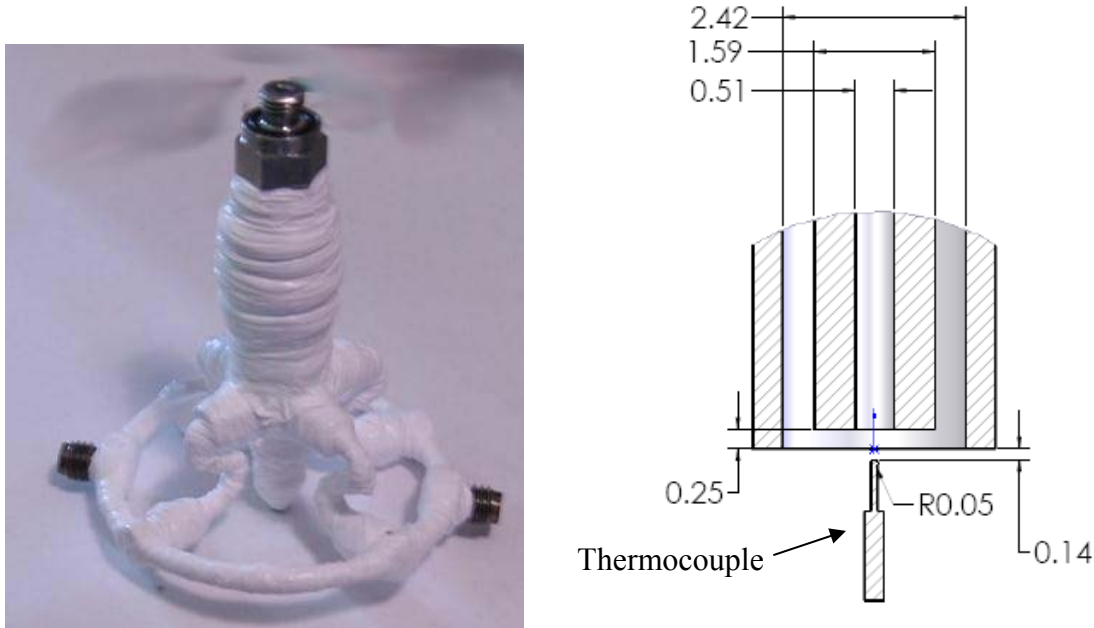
Picture of shear-coaxial injector (left) and cross-section drawing of the injector tip. The thermocouple used to measure exit-plane temperature profiles is shown in the drawing, indicating the relative size and axial position of the measurement.
